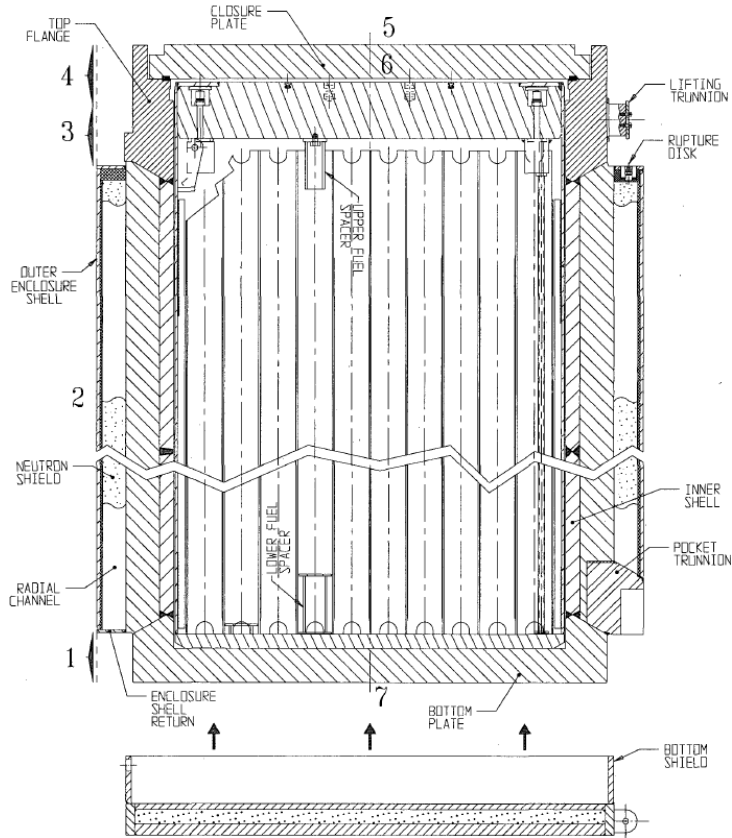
; CROSS SECTION ELEVATION VIEW OF OVERPACK WITH DOSE POINT LOCATIONS
